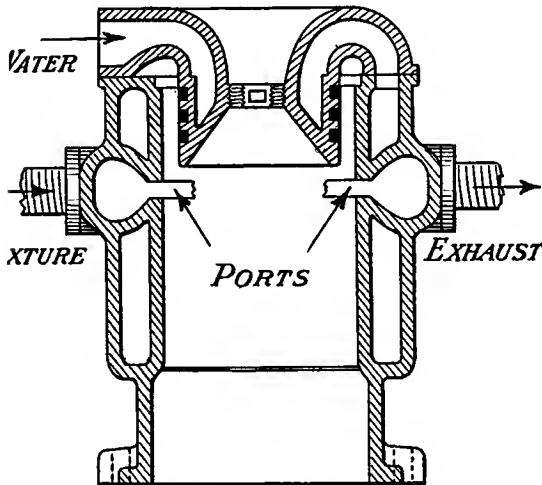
Cross-section of a Silent Knight Cylinder.
